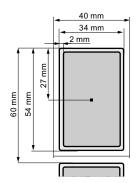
SIMATIC RF630L 6GT2810-2AB03 dimension drawing
